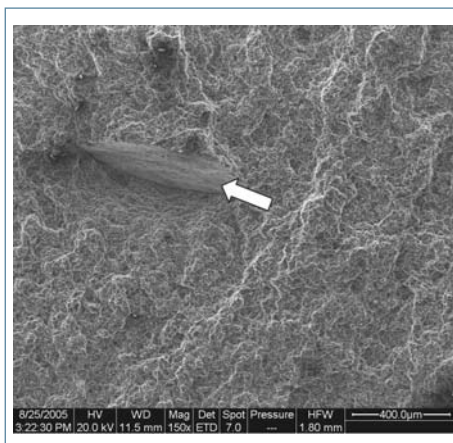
SEM micrograph of oxide film on the fracture surface of sample lying almost perpendicular to the fracture plane.
